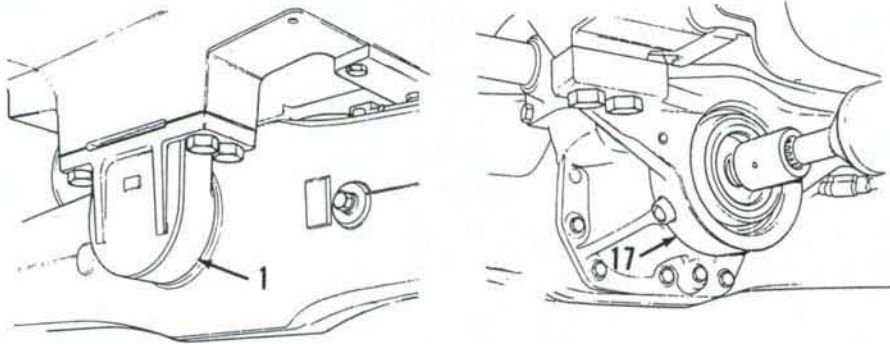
View of front and rear pivot brackets (1 & 17) installed. Four screws are used to attach each bracket to front support.
